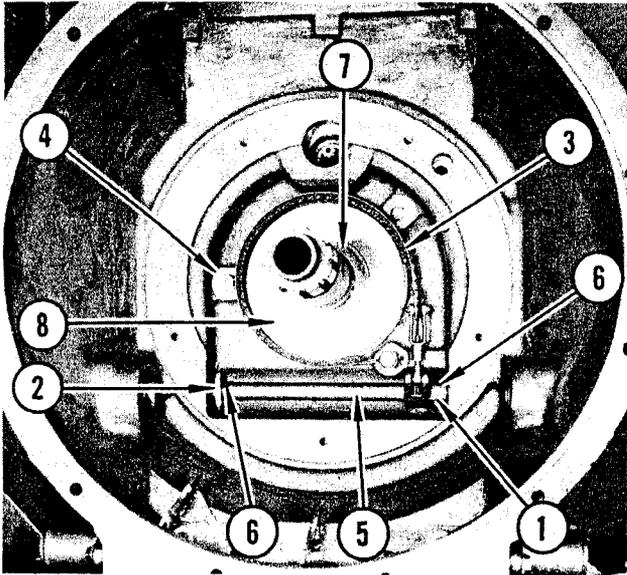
CLUTCH BRAKE ASSEMBLY
